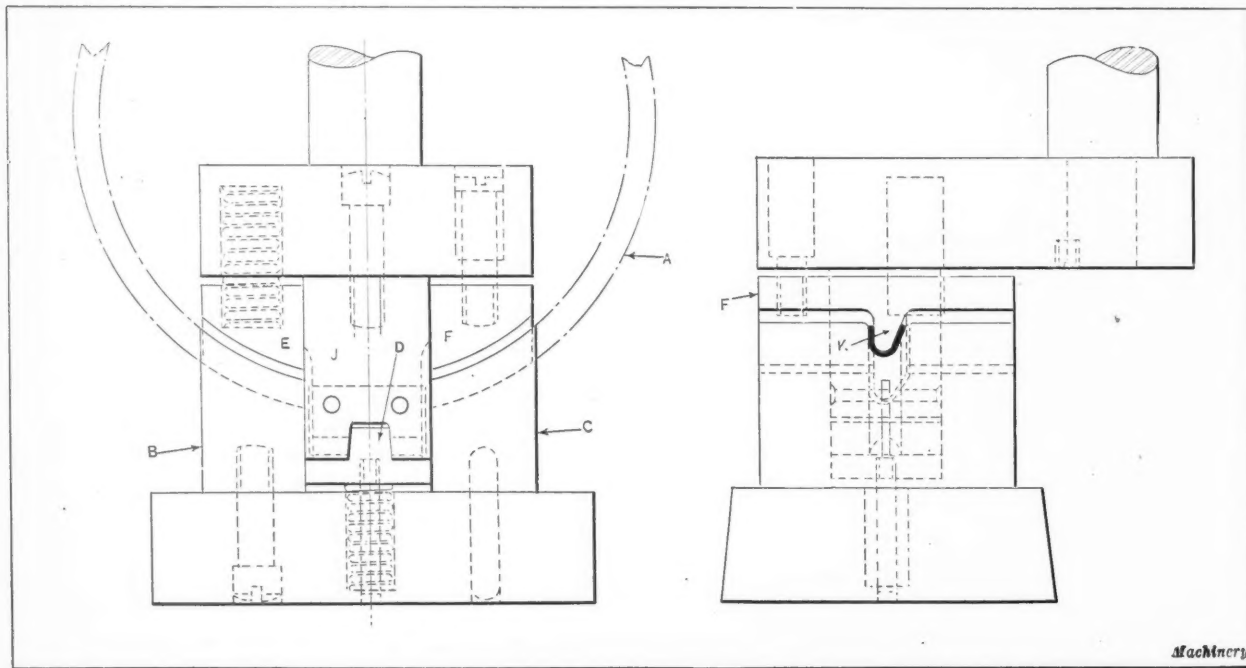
Complete Front and Side Views of Die shown in Fig. 2
